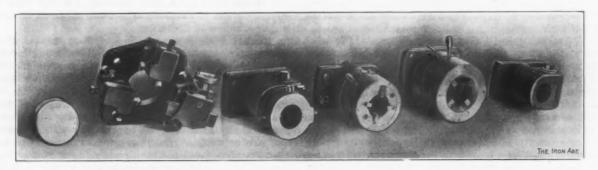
Turret Stop Bar, Box Tool, Pointing Tool, Two Die Heads and Tool Holder.
